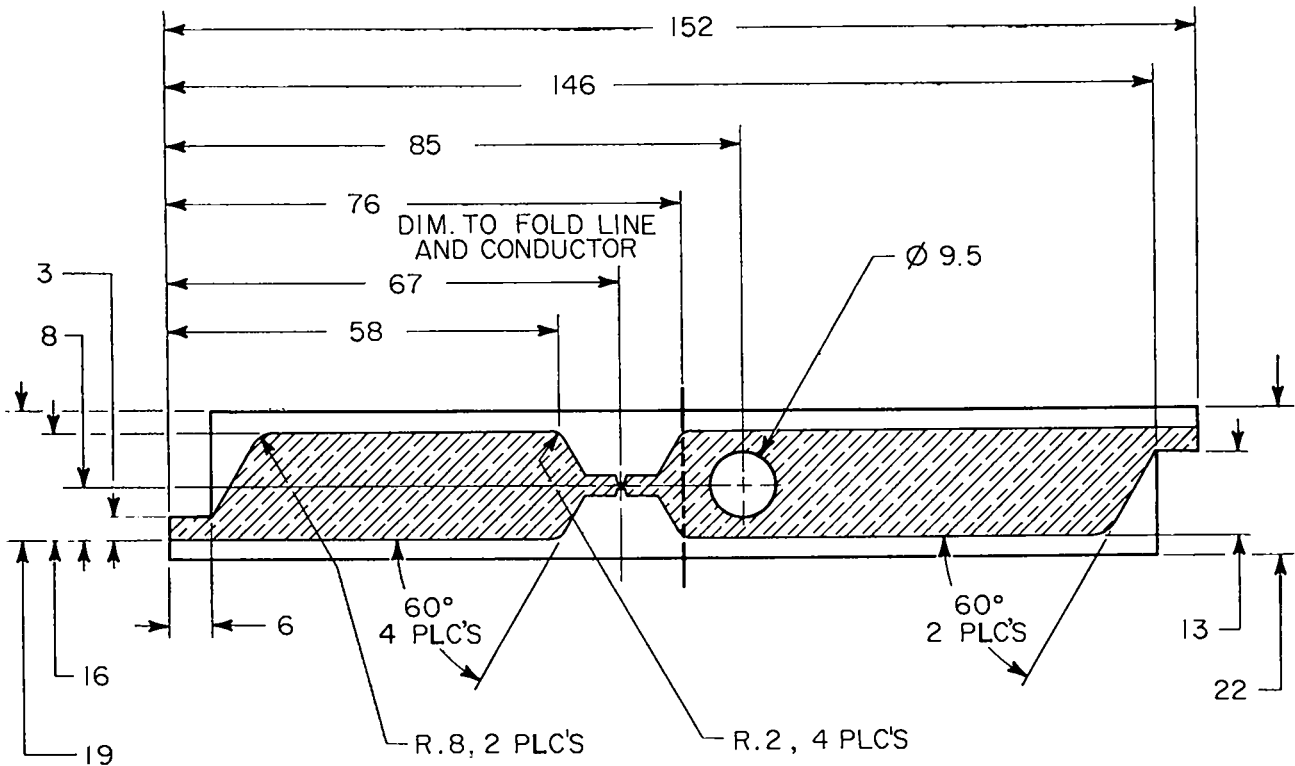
Bidirectional slapper circuit (dimensions in millimeters).
